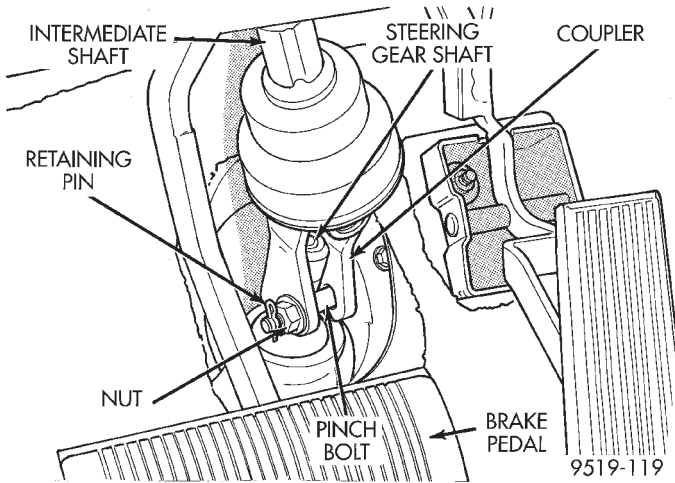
Intermediate Shaft Coupler To Steering Gear Shaft
